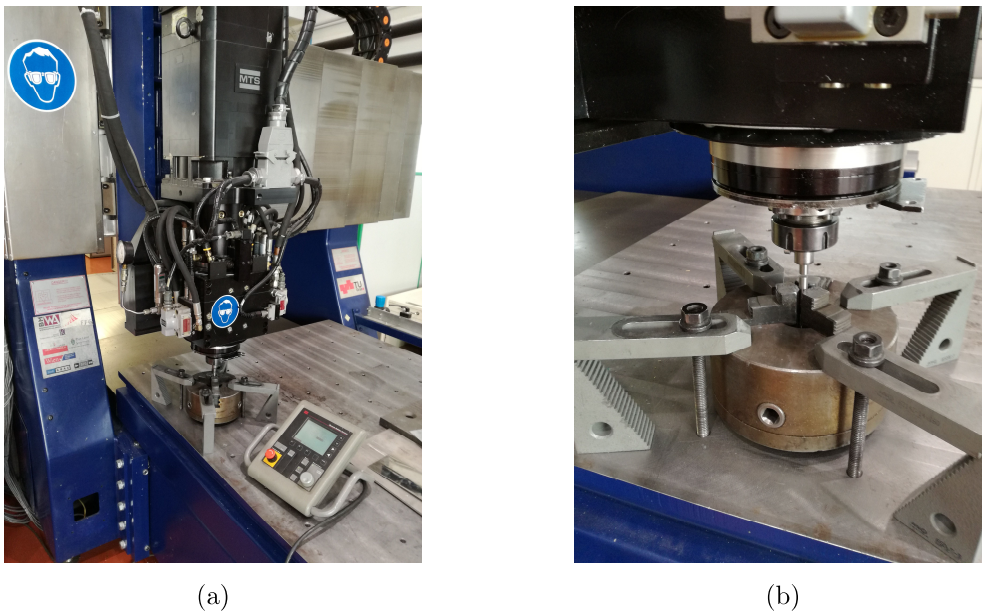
Experimental set-up DDFW: (a) FSW MTS I-STIR BR 4 device and (b) applied clamping system
